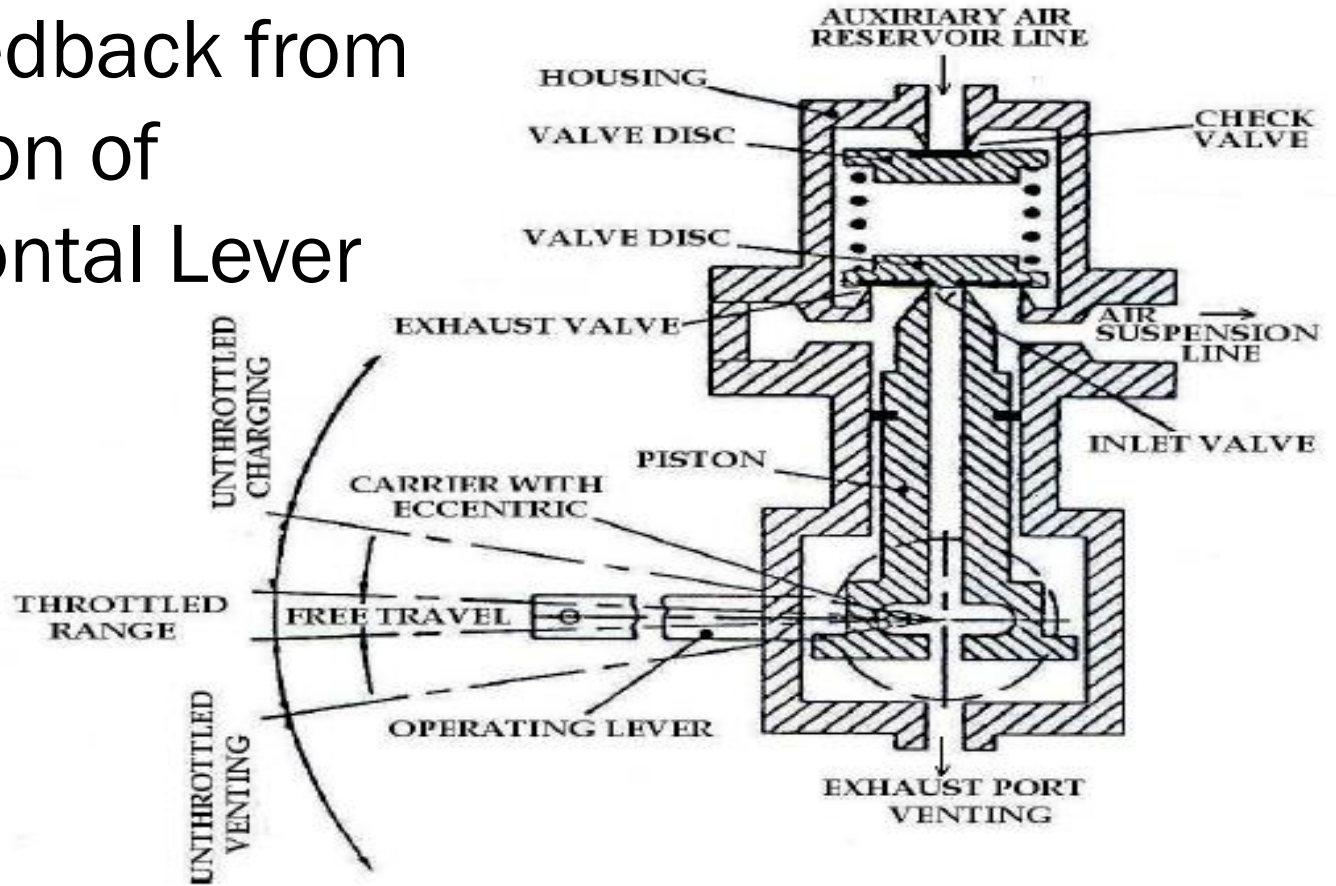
FIG. THROTTLED AIR SUSPENSION LEVELLING VALVE (Lap Position)
